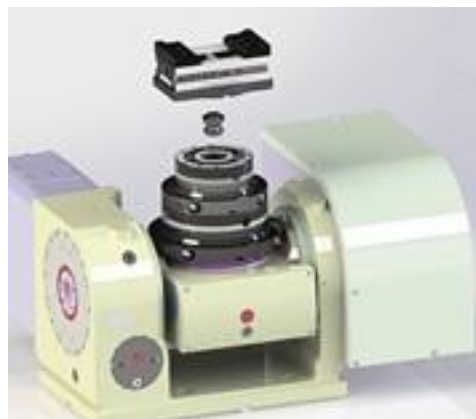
Modular Fixturing for Multi-axis Machines [14]
